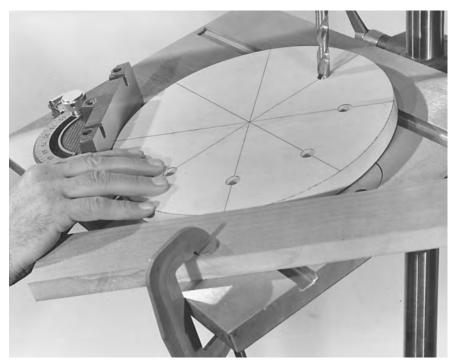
Control accuracy when drilling angular holes in circular pieces by using the V-block arrangement shown here.
